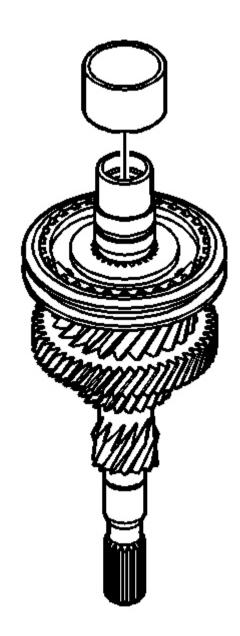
View Of Bearing Collar Courtesy of GENERAL MOTORS CORP.
